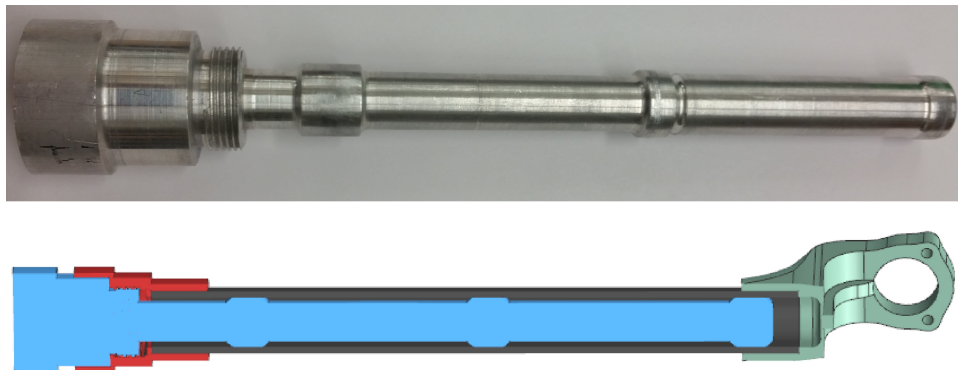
Custom epoxy jigs used to align the inner carbon fiber tube assemblies while curing, and a section view showing how the jig constrains each part.
